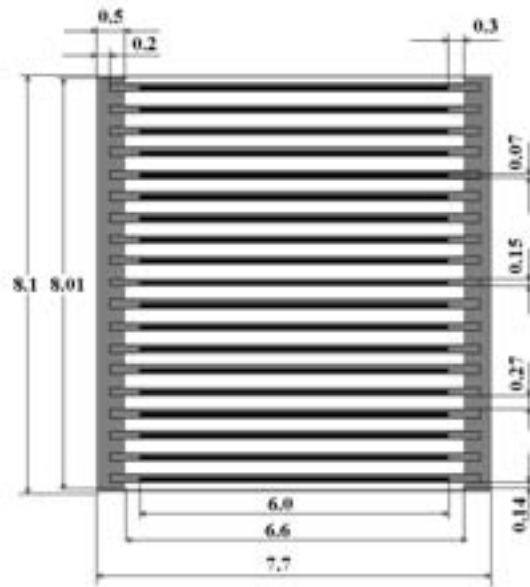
RA-3 standard fuel assembly. Dimensions are in cm.
